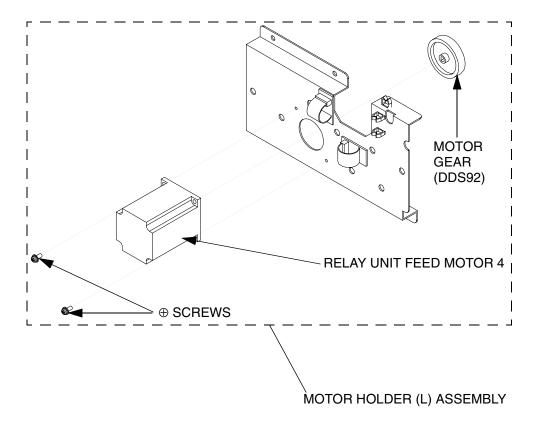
Removal of the Relay Unit Feed Motor 4
